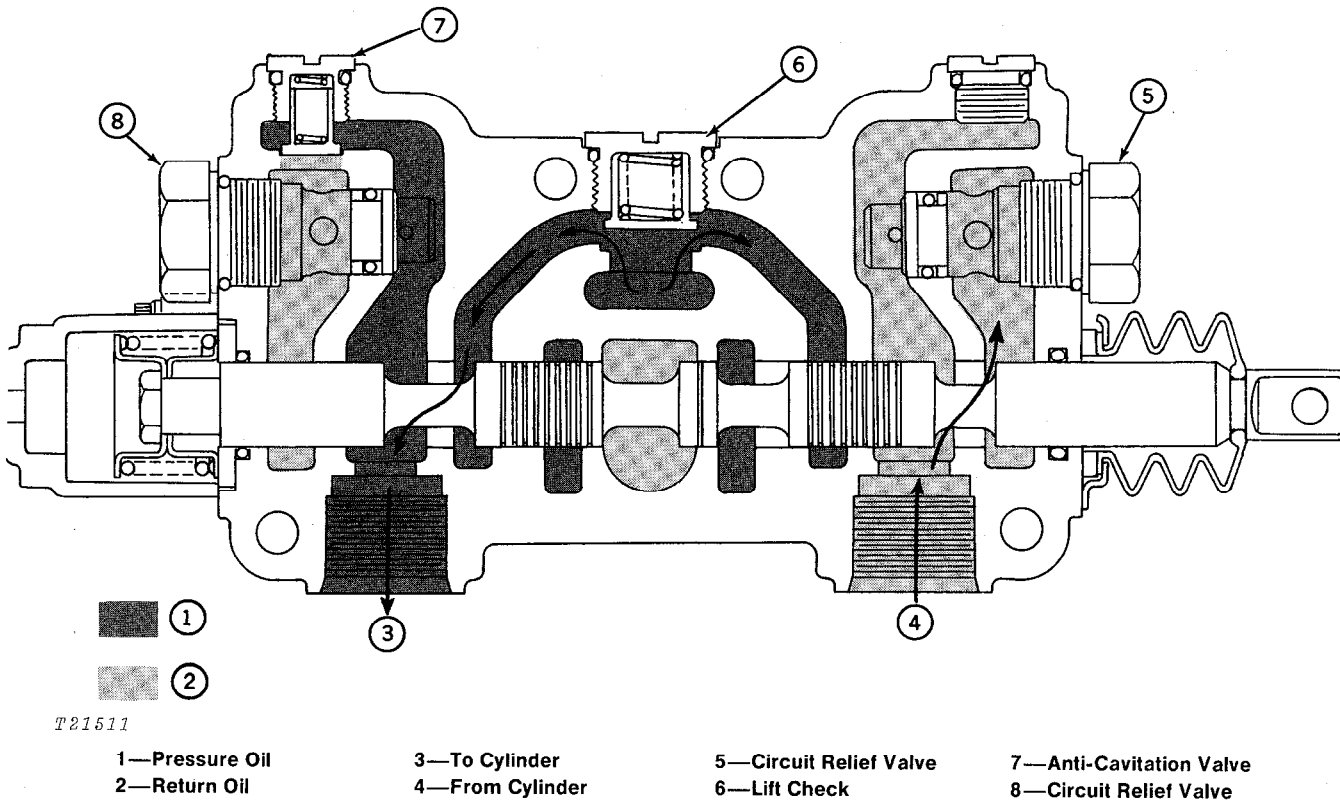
Oil Flow Through Valve Section (Boom Section Illustrated)
